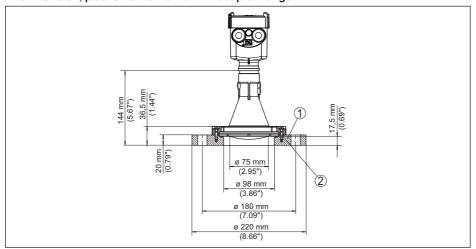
Radar sensor with adapter flange DN 100 PN 6
